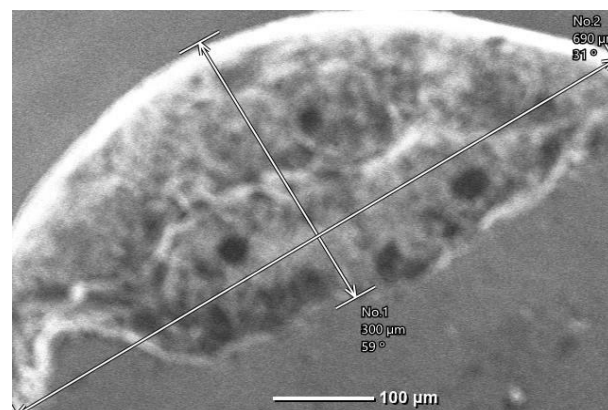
Flank wear of the Single cutting tool at 150X magnification (50 m/min cutting speed, 0.525 mm/rev feed, and 1.00 mm depth of cut)
